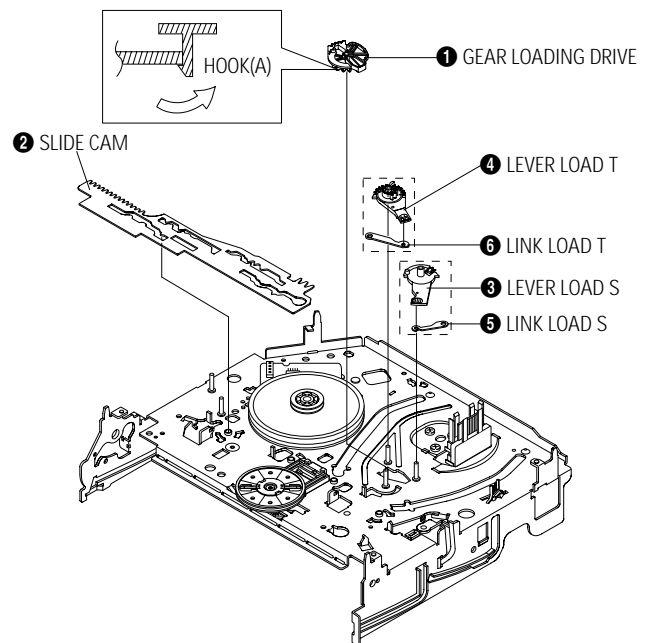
Gear Loading Drive, Slider Cam, Lever T, S Load Ass'y Removal
